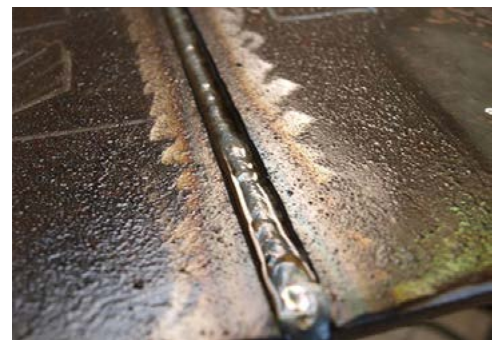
Weld groove with excessive amount of anti-spatter substance after making a root run
